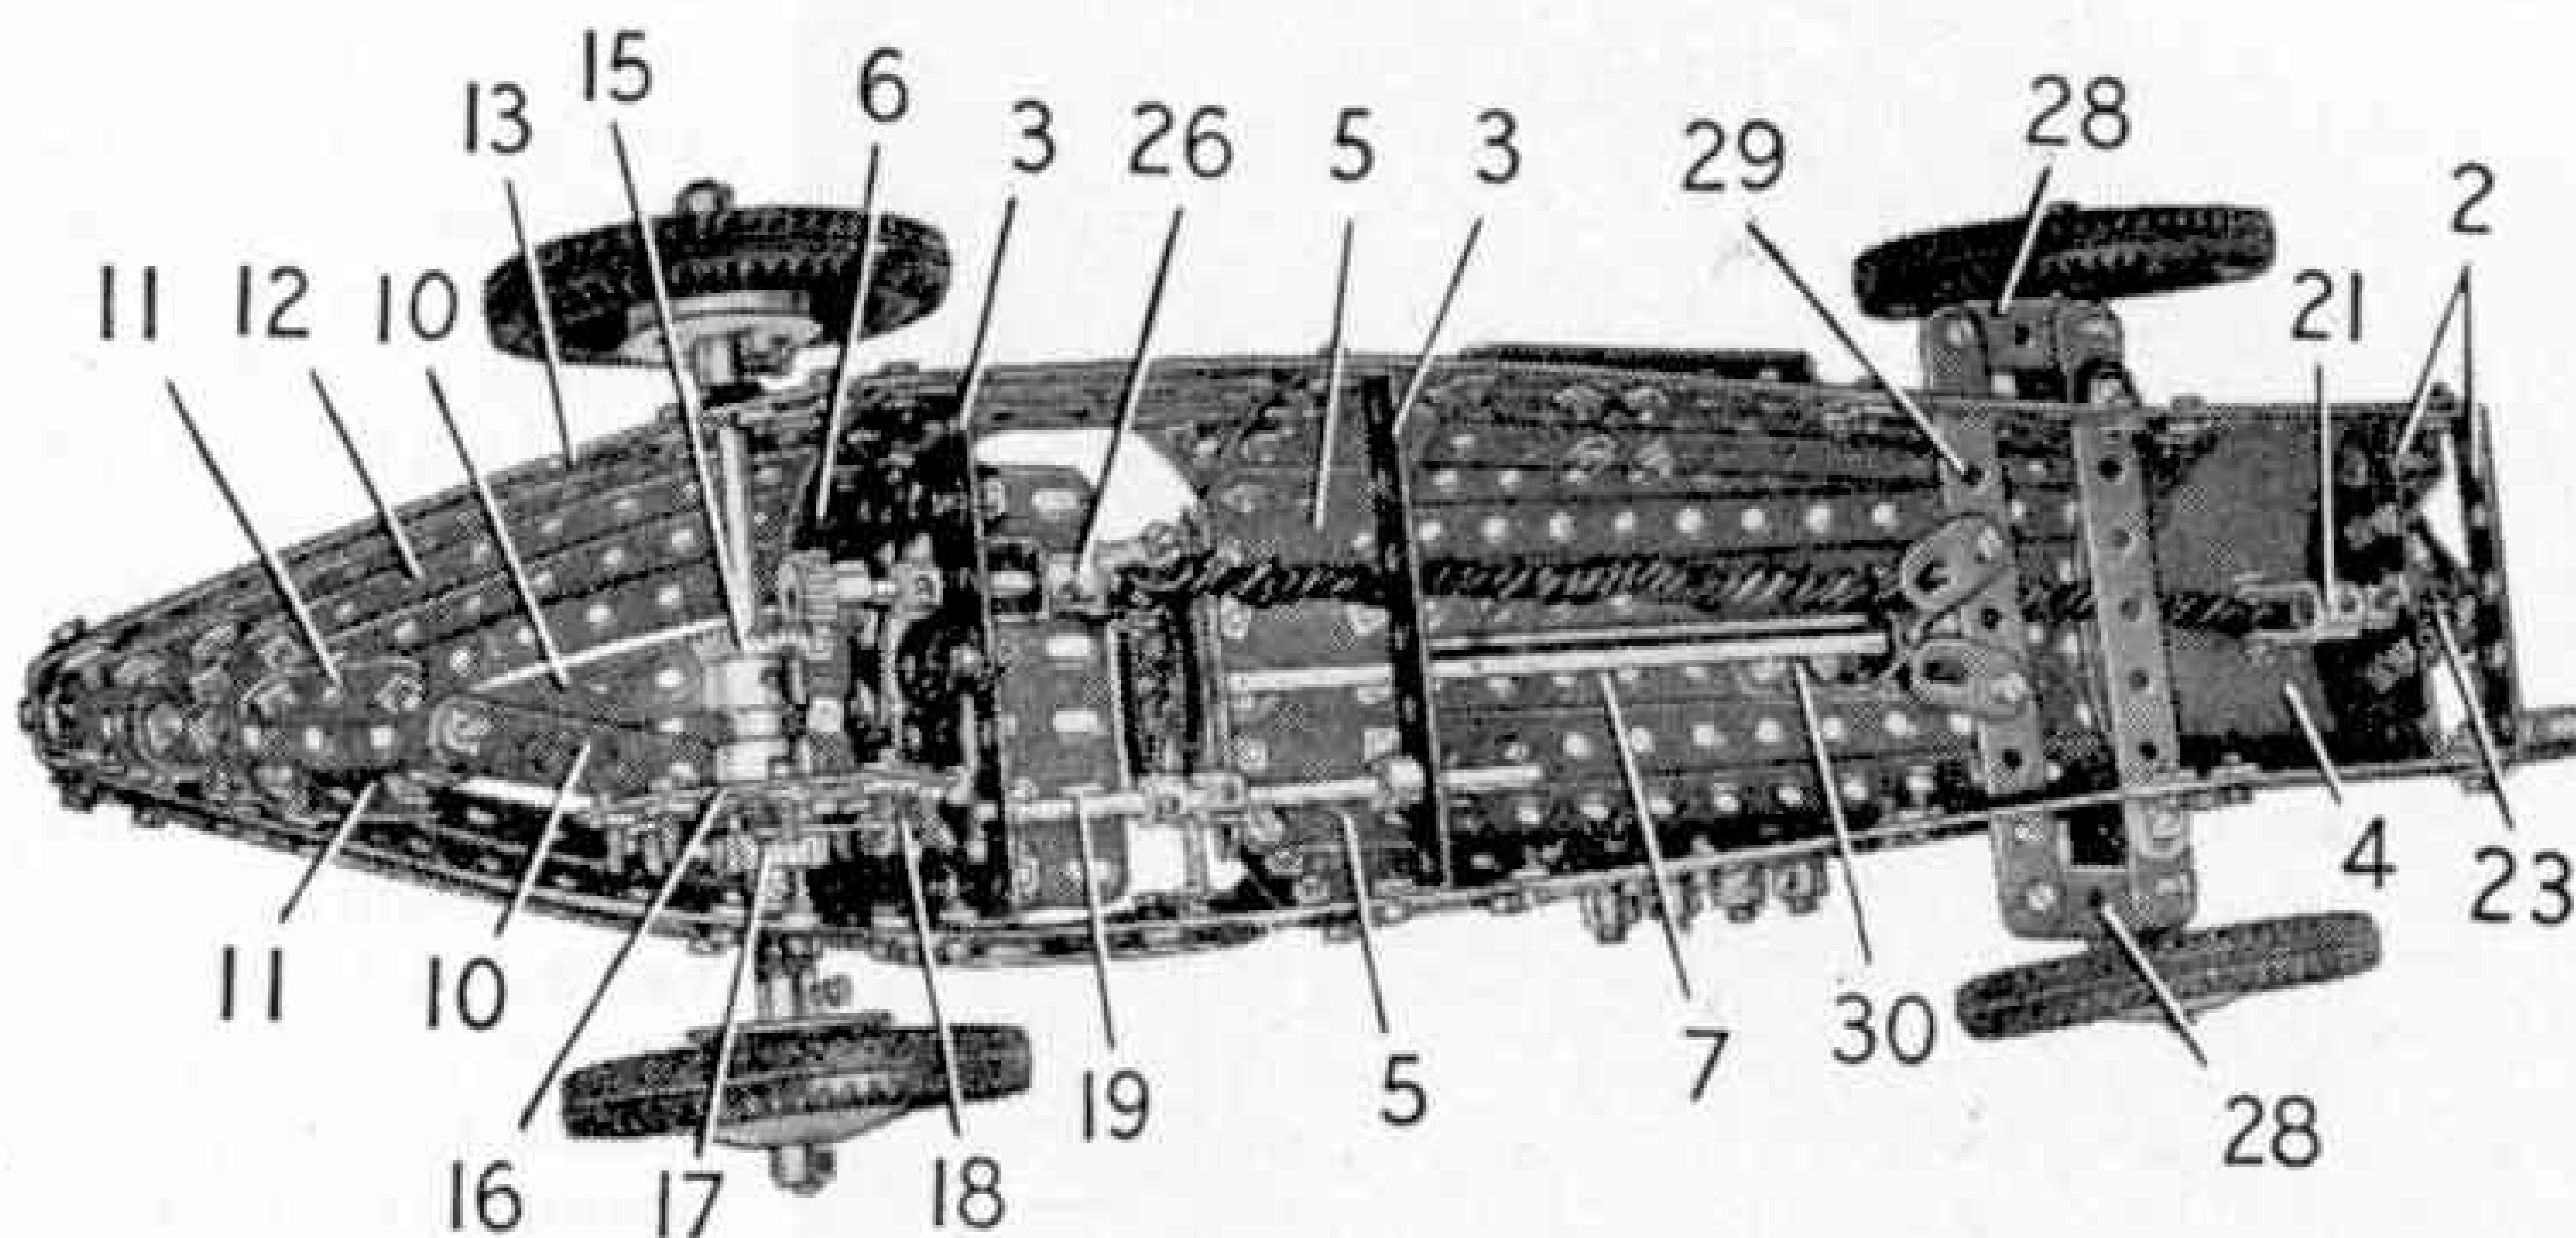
An underneath view of the racing car, showing the arrangement of the rubber Driving Bands.
